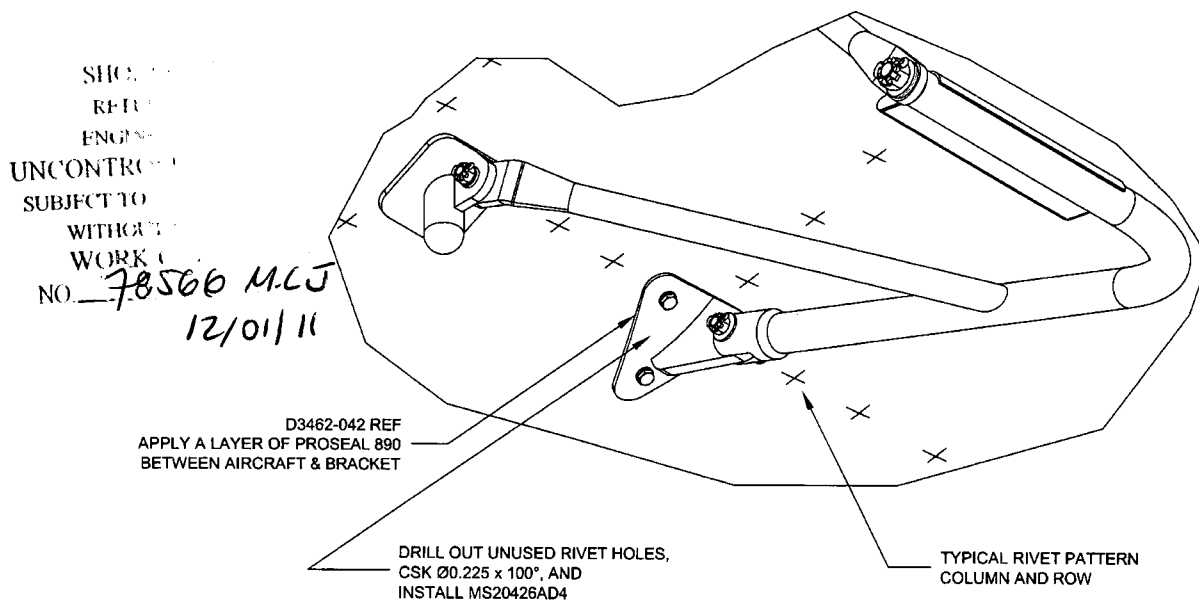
Detail View D3462-042 Bracket Assembly (-032 Installation, Shown) D3462-041, (-031 Installation Opposite)
